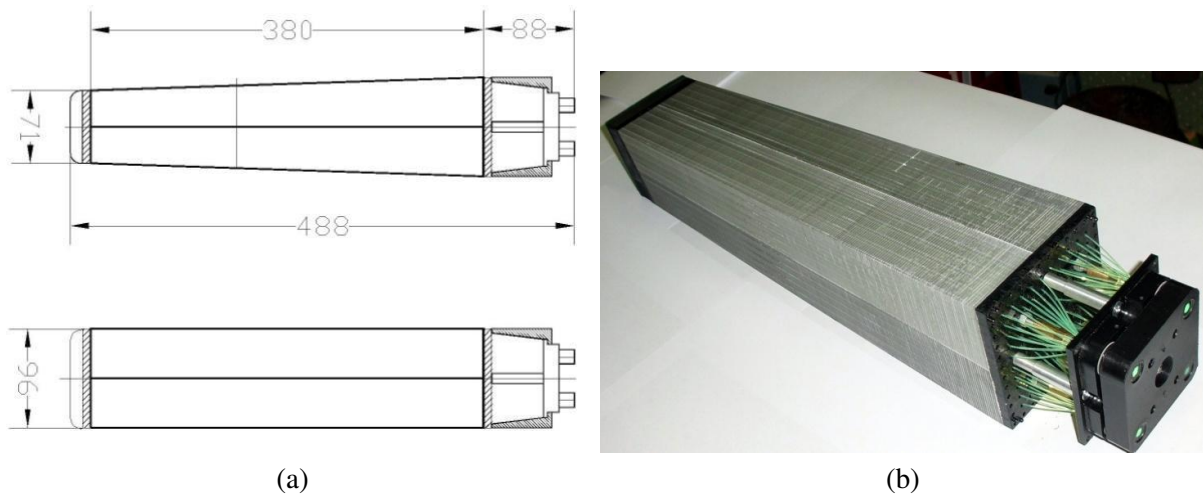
ECal module drawing (a) and photo (b) without light shielding cover.
